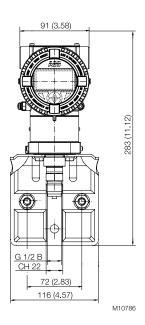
Dimensions - Barrel housing – DIN-EN837-1 G 1/2 B connection
